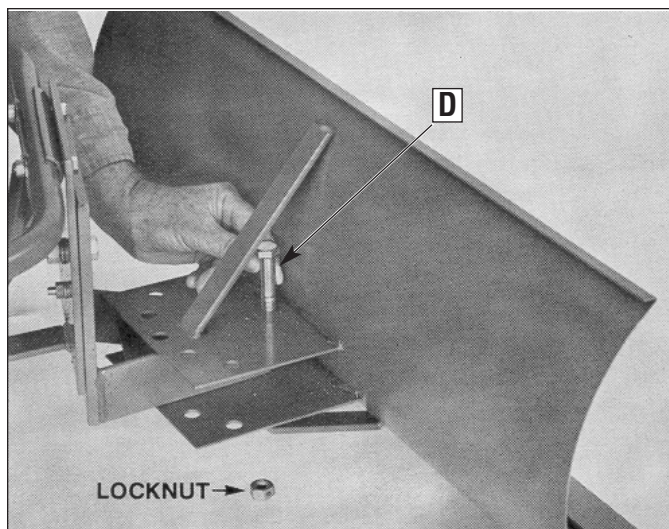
ATTACHING THE BLADE TO THE SWIVEL BRACKET
